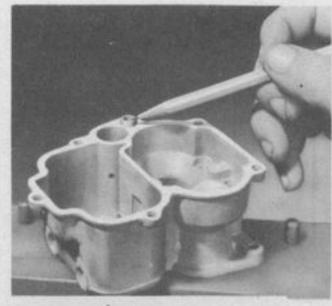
Shoulder Around Hole for Accelerating Pump Rod
